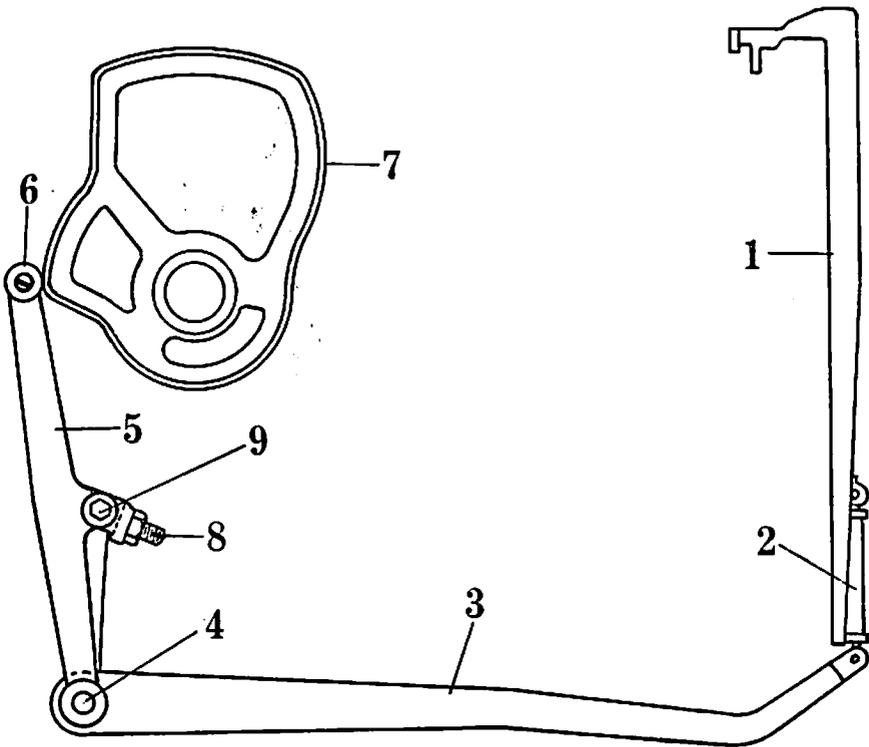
Side View of the First Elevator and Related Parts in Assembly
